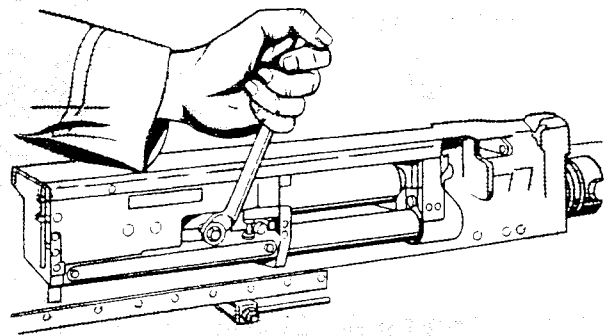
Turning Castle Nut to Loosen Clamping Bolt on Gun Charger
